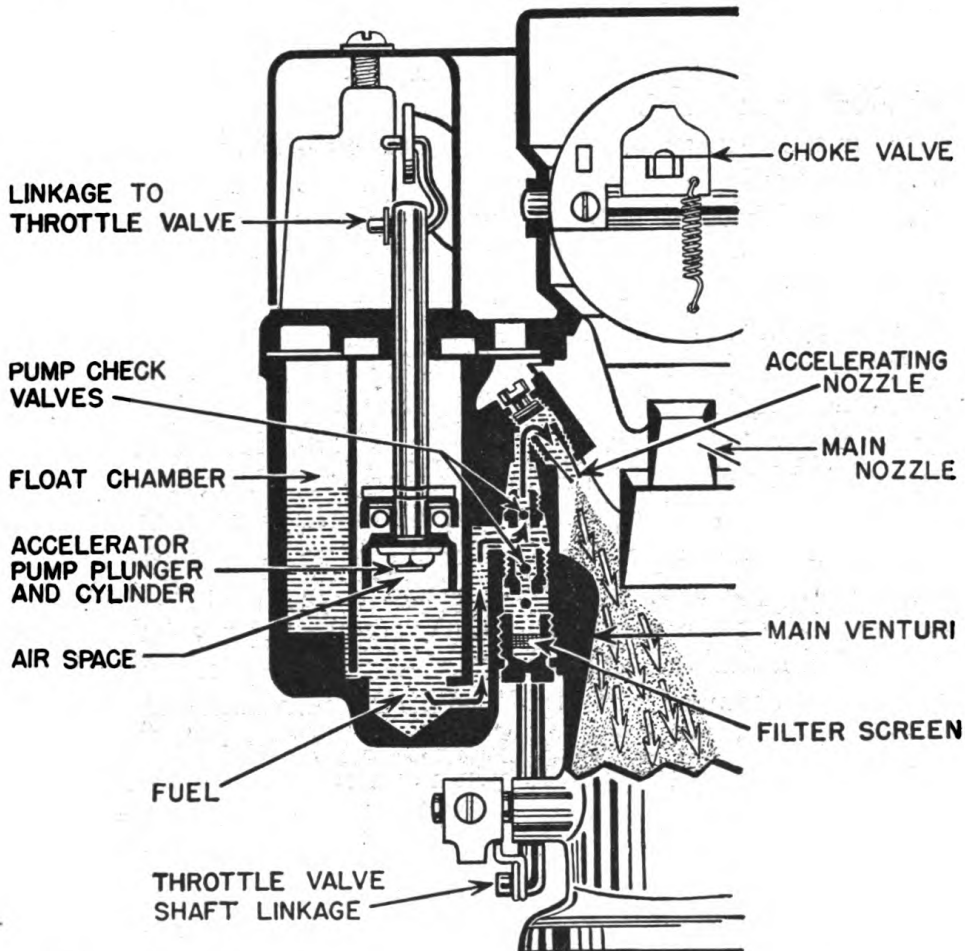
Accelerating pump mechanism in a metering rod type carburetor.
